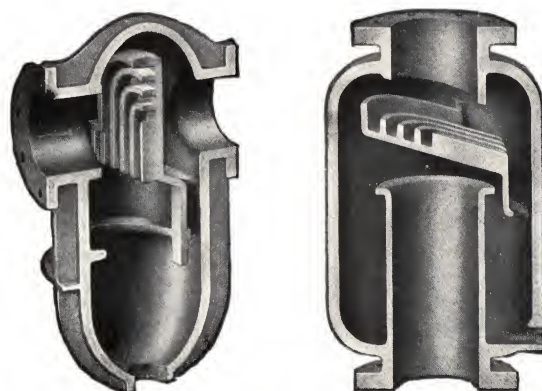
Webster Steam Separators. Horizontal Type at Left, Vertical Type at Right
